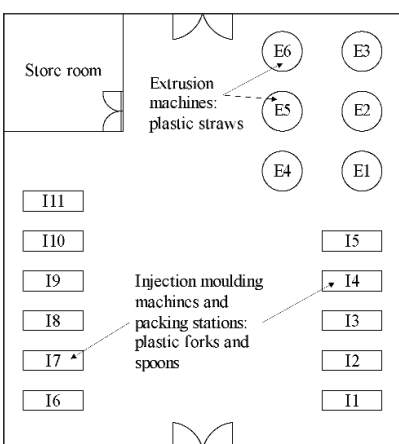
General layout plan of a single storey plastic injection moulding and extrusion plant
